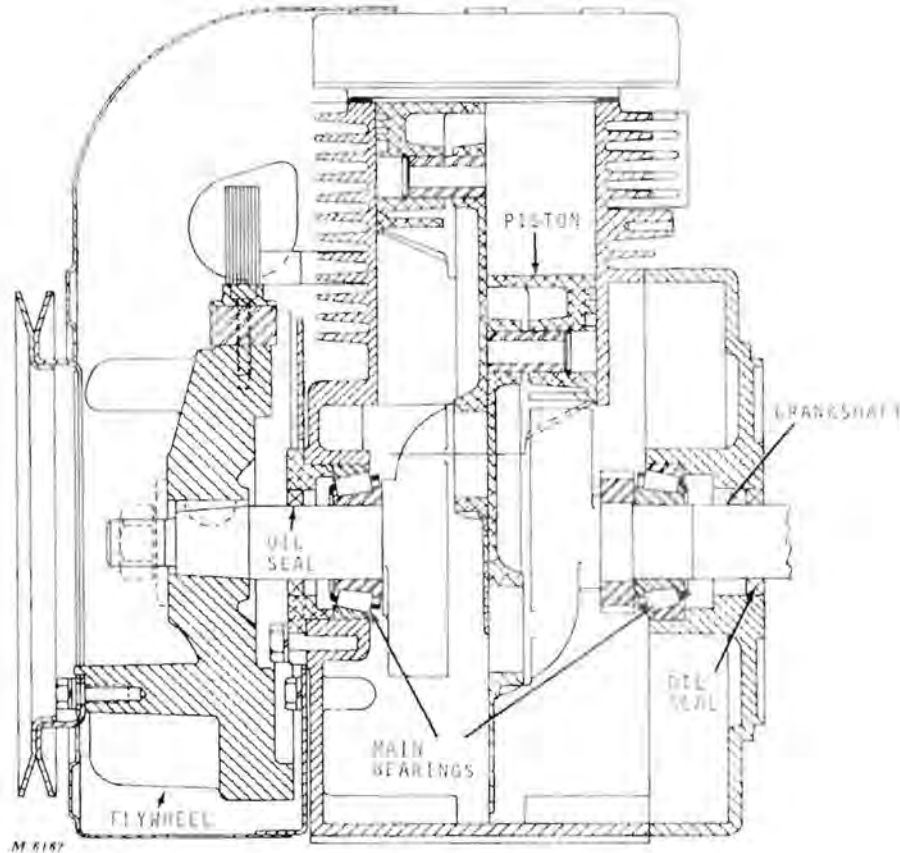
Cutaway View of Tecumseh HH100 Engine
